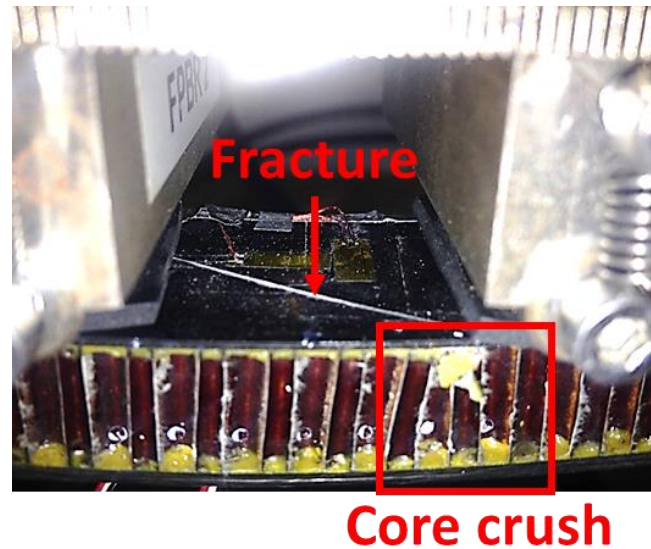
Visual damage observation shows the failure modes exhibited in the sandwich beam.
